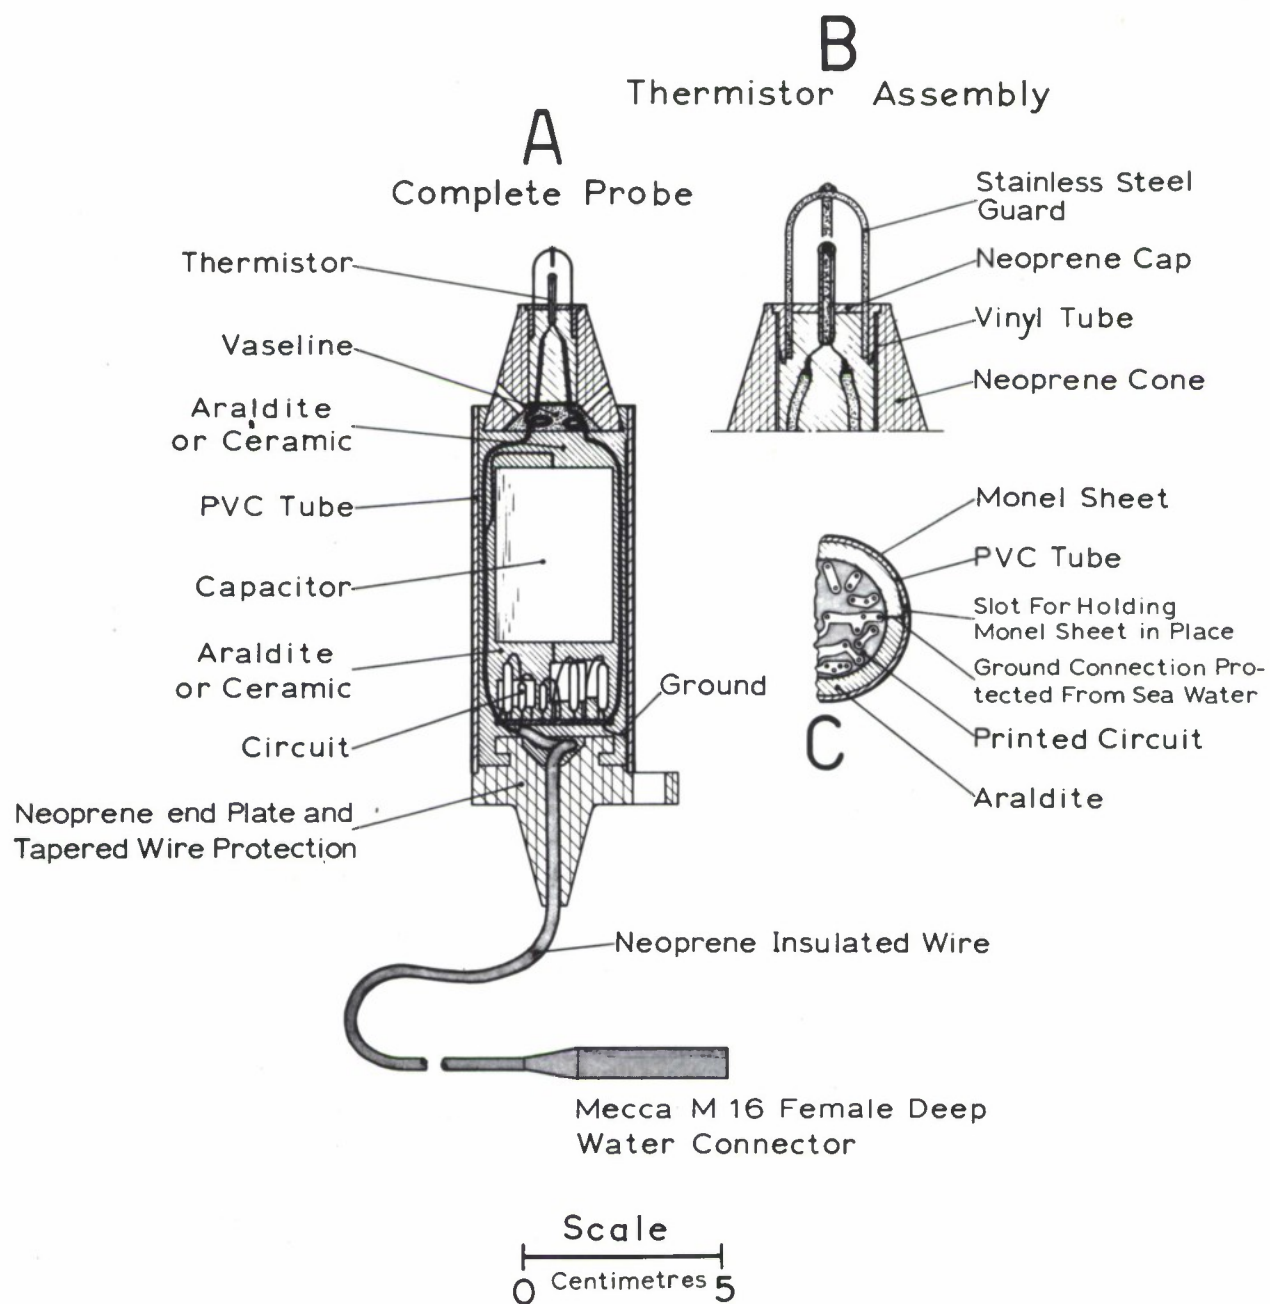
THERMOMETER – CROSS SECTION VIEW
